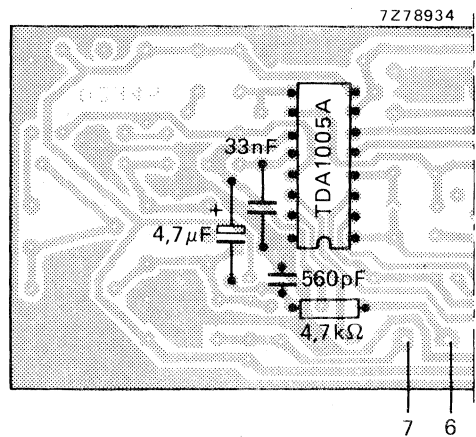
Printed-circuit board component side, showing component layout of Fig. 15.
